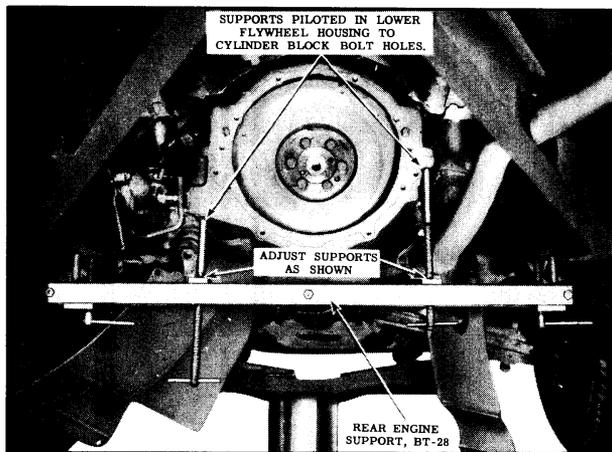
Support Bar in Place At Rear of Rocket Engine for Clutch Removal
